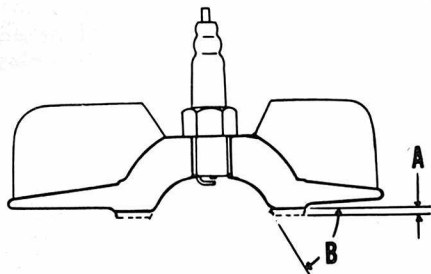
Angle of taper (B) must be remachined in head after it has been modified for higher compression.
